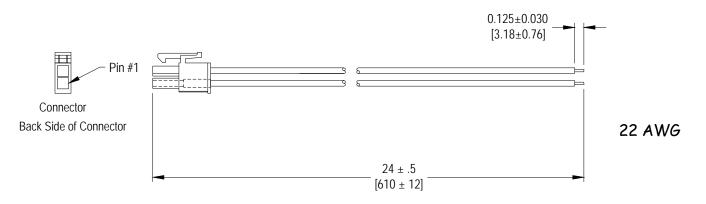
MOTOR POWER SUPPLY MATING CONNECTOR (C1)
